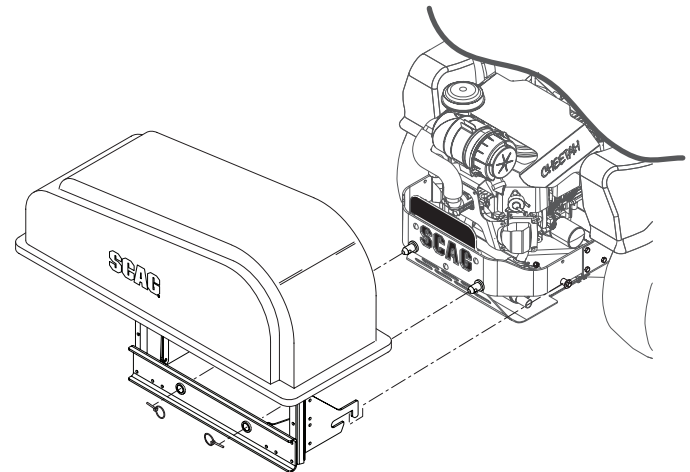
STT / STTII Hopper Mounting Hardware Install
